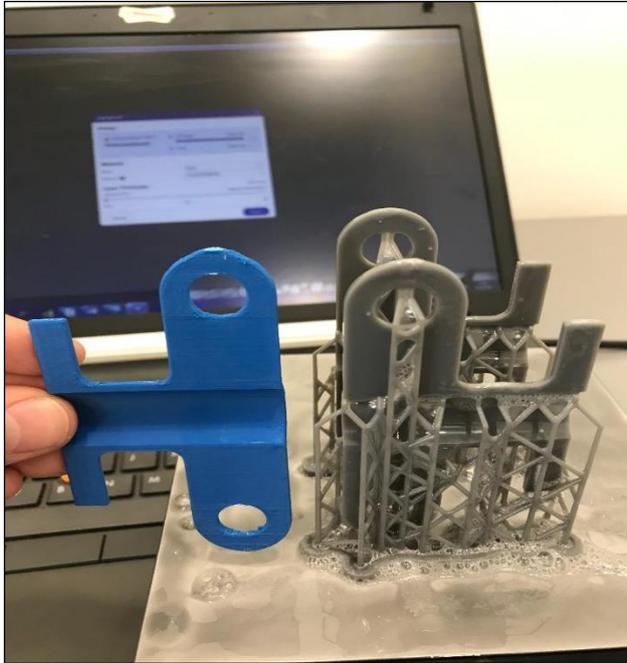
The cable fixing clamp printed using FDM technology and by DLP technology
